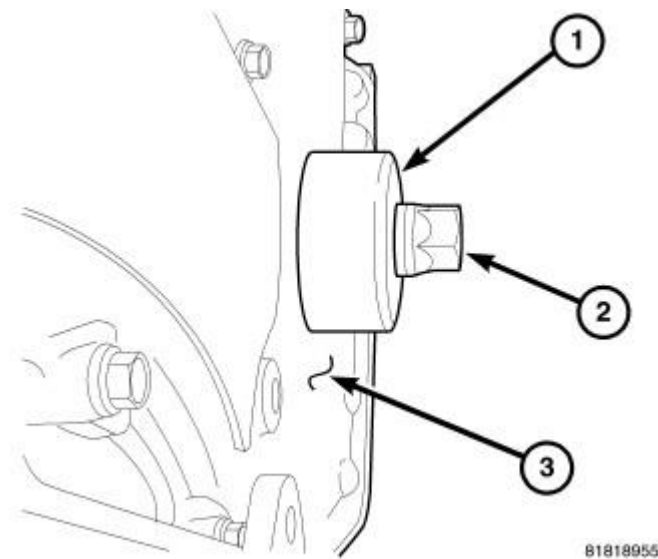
Seal Installer Seated Against Timing Chain Cover
